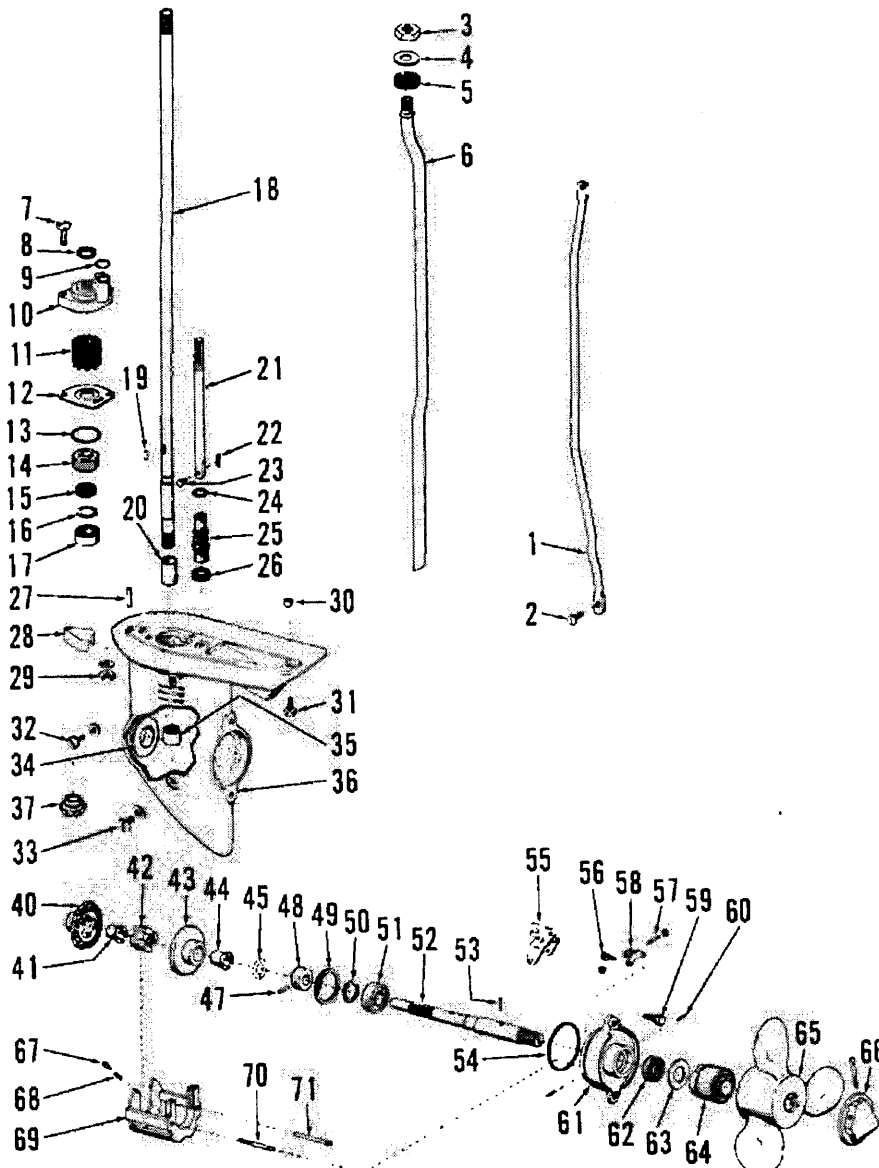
Exploded view of full gear shift lower unit. When assembling lower unit, use petroleum jelly to lubricate water pump impeller (11) and water tube seal (9).
